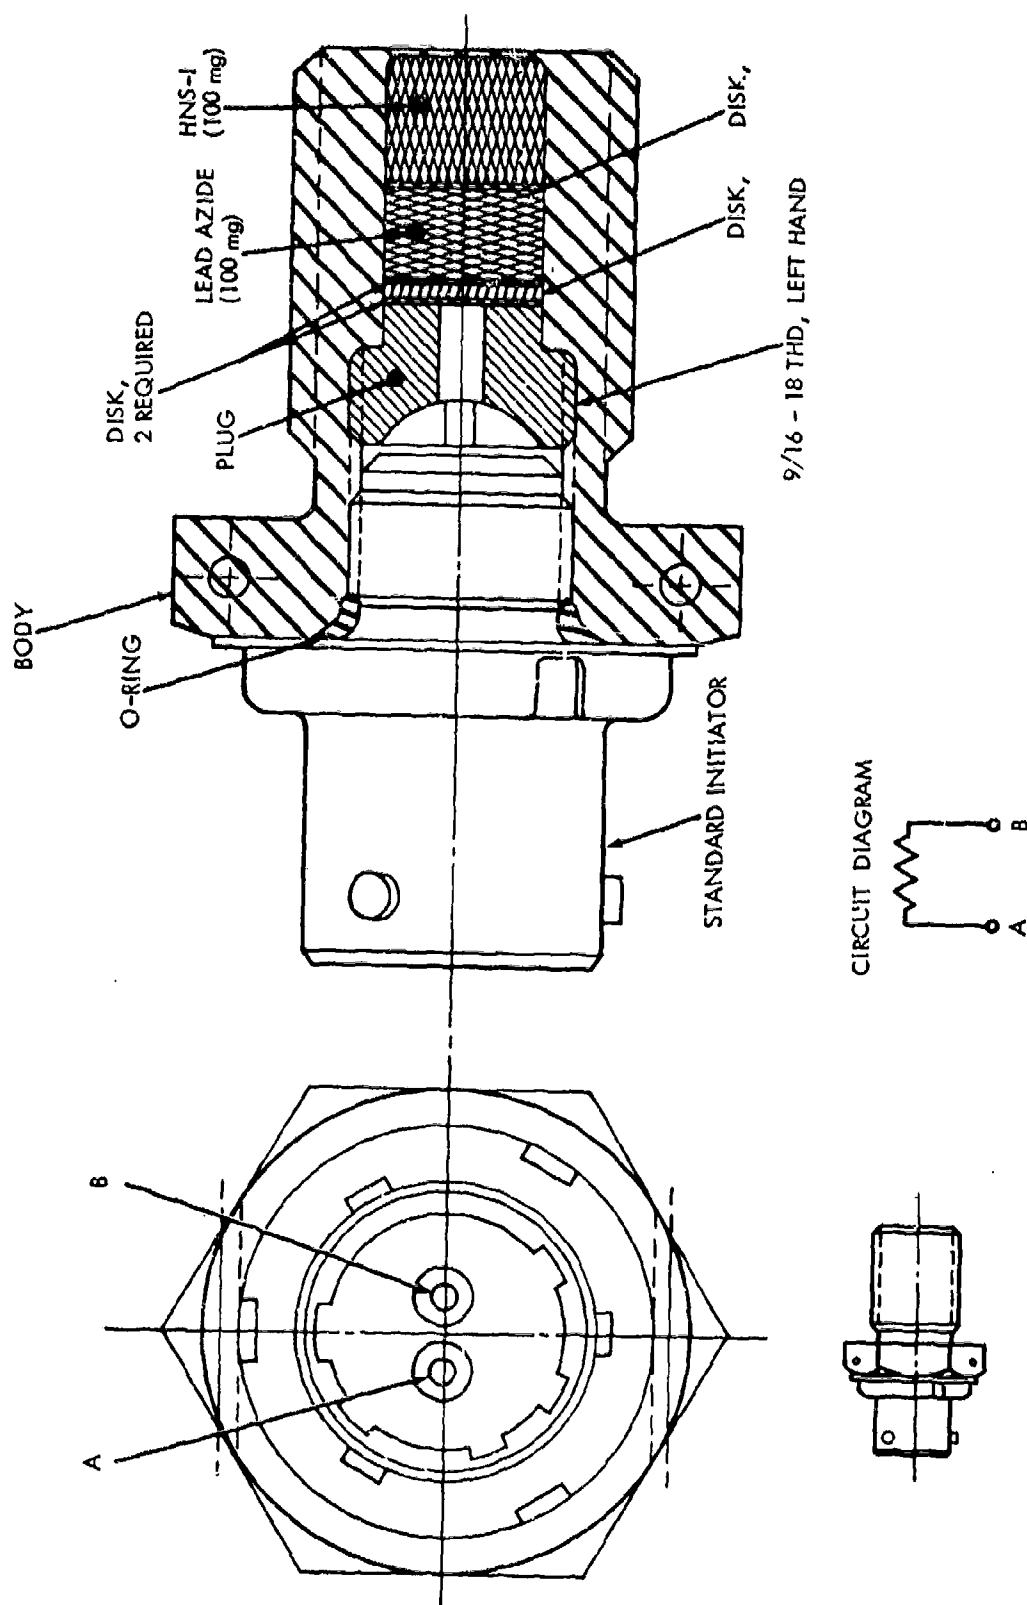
DETONATOR ASSEMBLY, (SOS DWG NO. 15-10198-15)
